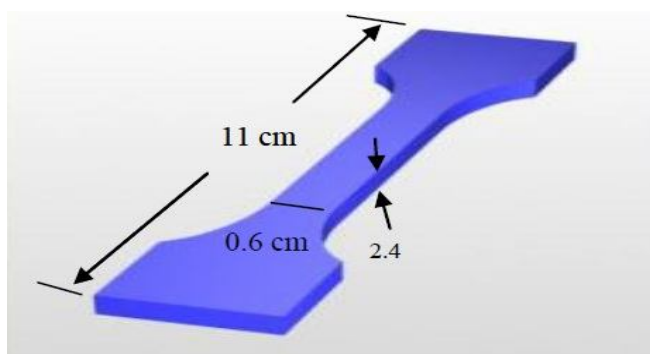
Shows the tensile specimen coupon dimensions centimeters.
